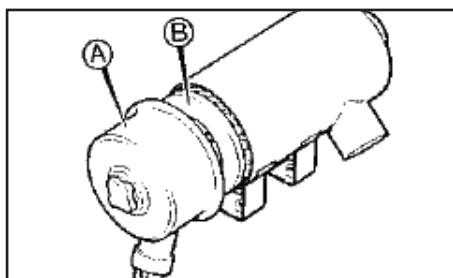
Air Cleaner, (A) dust cap, (B) paper element
